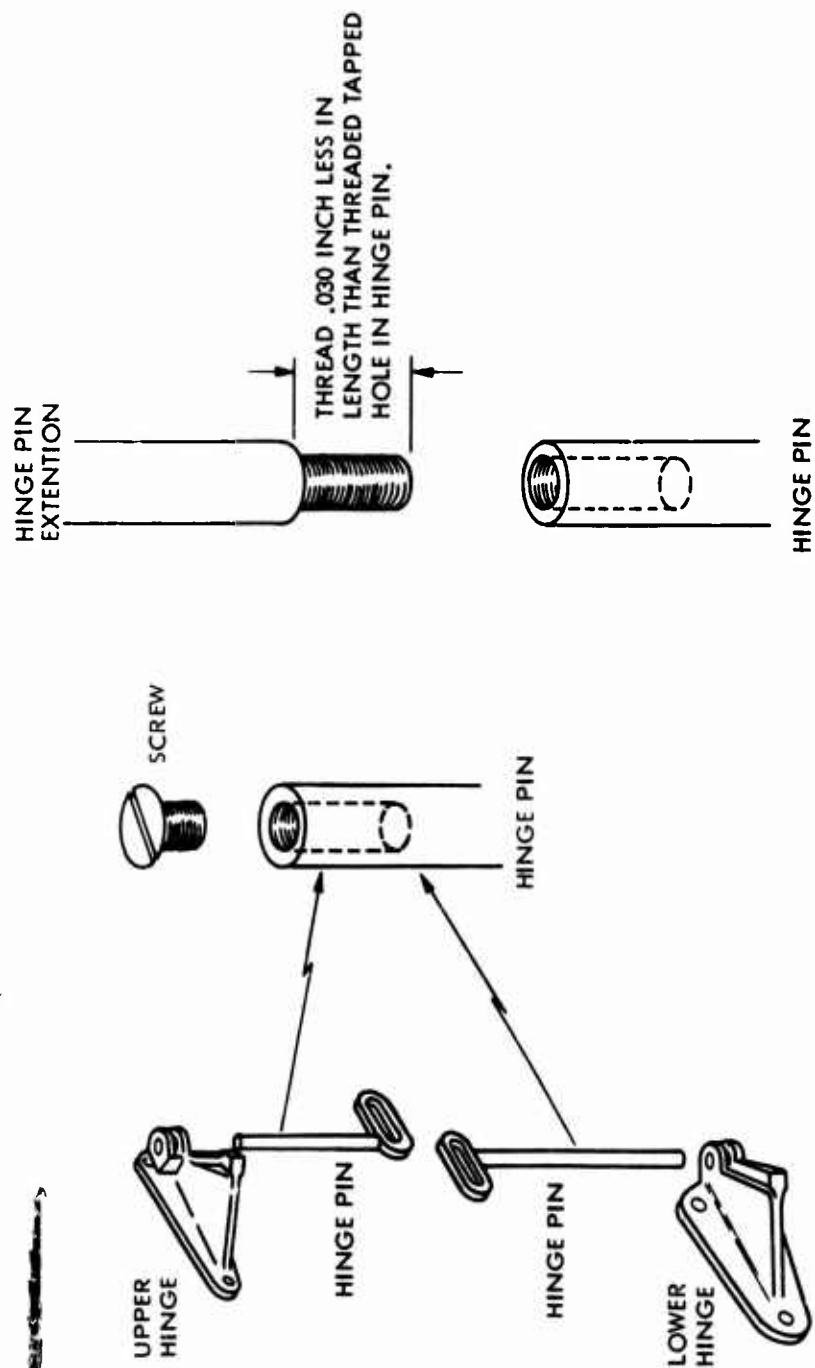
Door Jettison Mechanism - Hinge Assembly.
